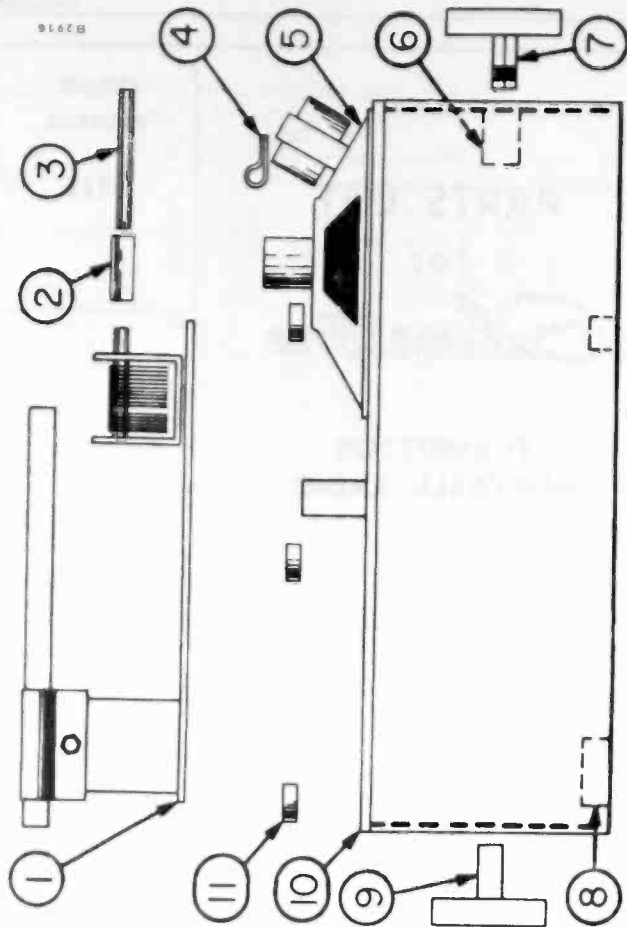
EXPLODED VIEW OF CABINET PARTS
